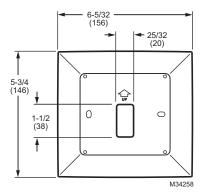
Dimensions of VisionPRO cover plate in in. (mm).
